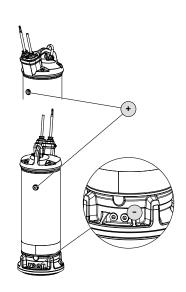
Cooling system: Check the FKT 20.2 coolant
